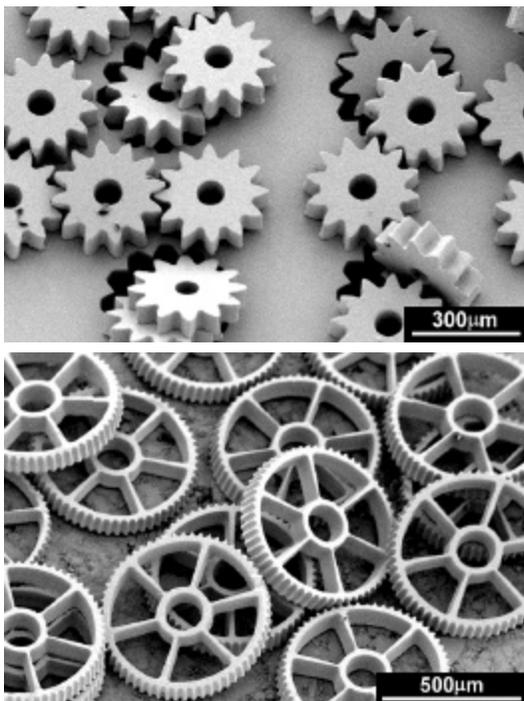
WC-Co super hard alloy gears cut from a 70 µm thick workpiece using electrode arrays of Fig. 2.
